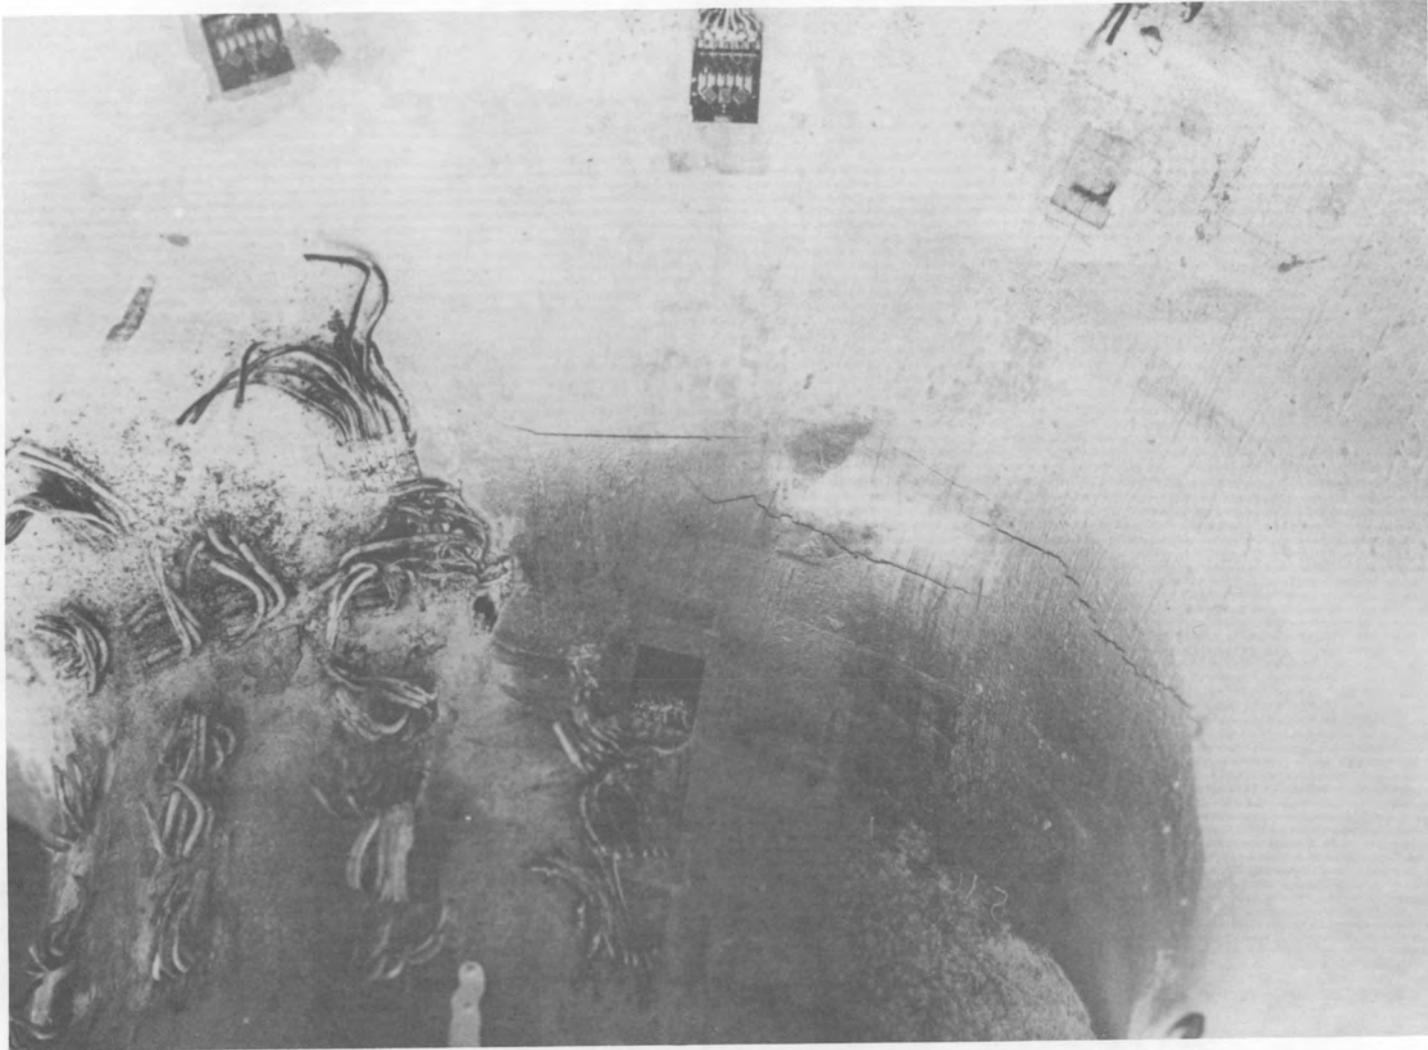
Fatigue cracks on inside surface of T-8 at 270° after failure (without dye penetrant).
